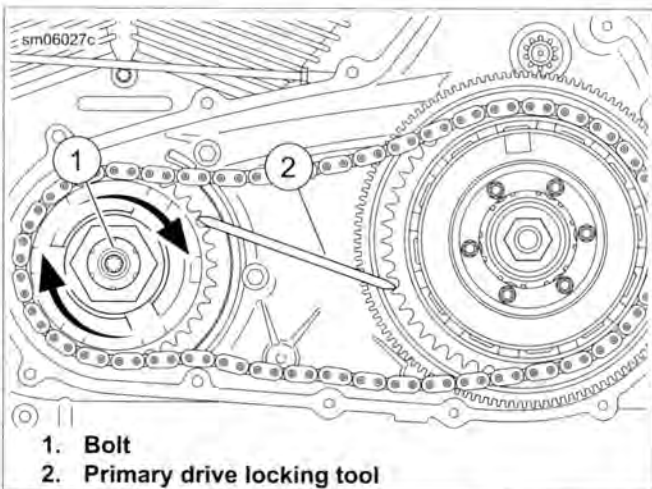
Installing Engine Compensating Sprocket Bolt
